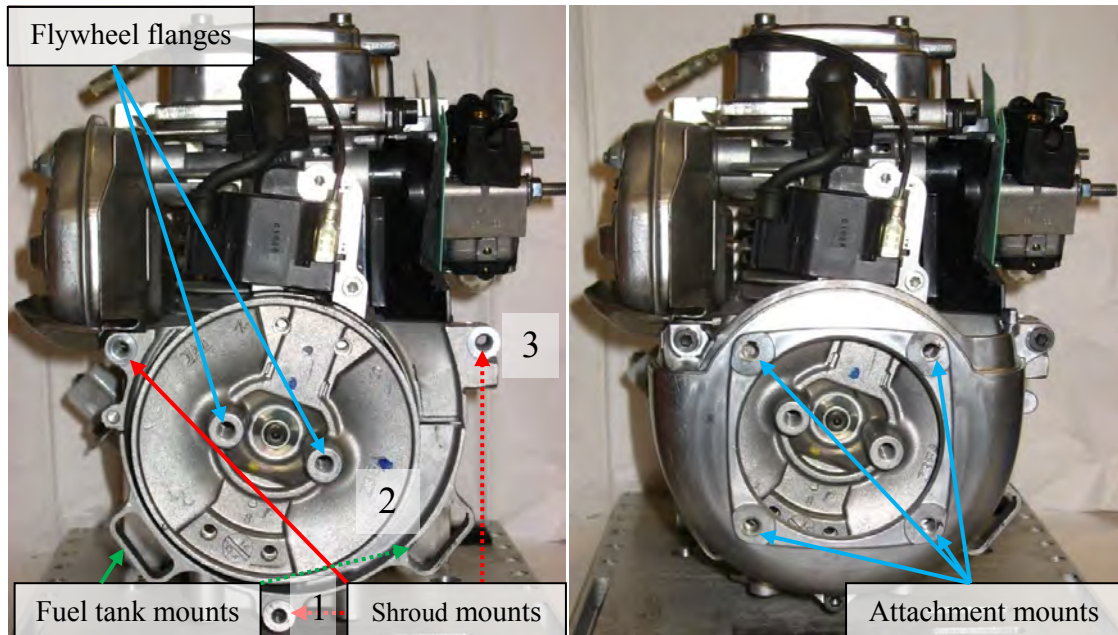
Stripped Honda GX35 without flywheel shroud (left), with flywheel shroud (right); dashed lines indicated selected mounting points for EM bracket
